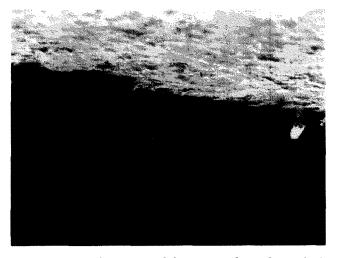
SEM micrograph of fracture surface of sample 3, showing the defect.
